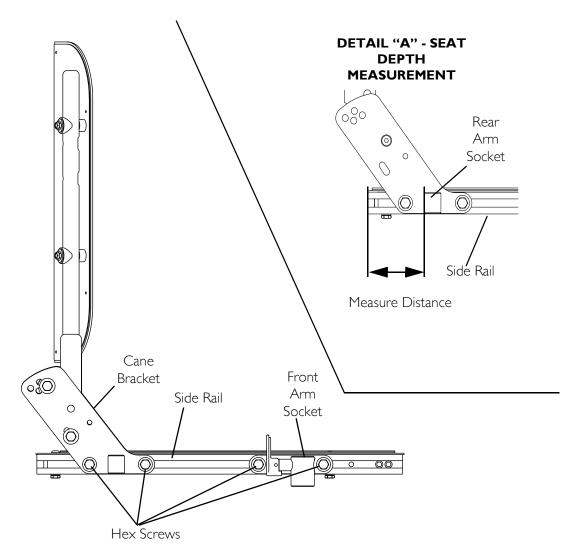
Adjusting the Seat Depth - Adjustable ASBA Seats
